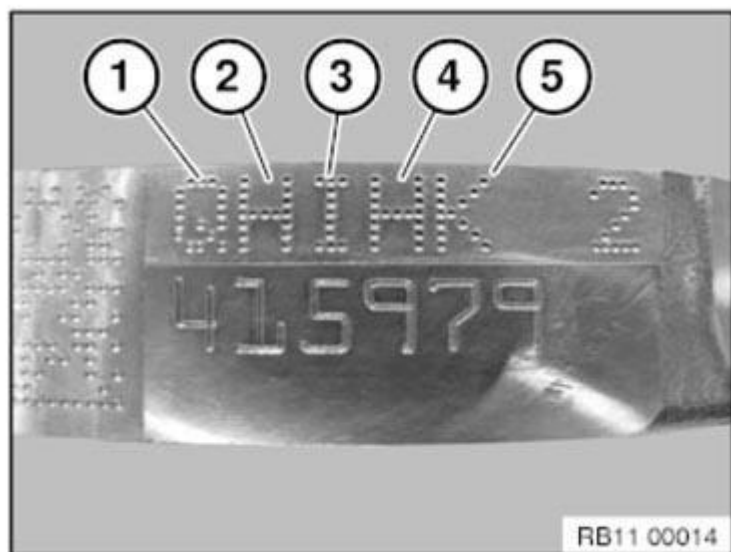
Identifying Color Assignment On Crankshaft 1 To 5
